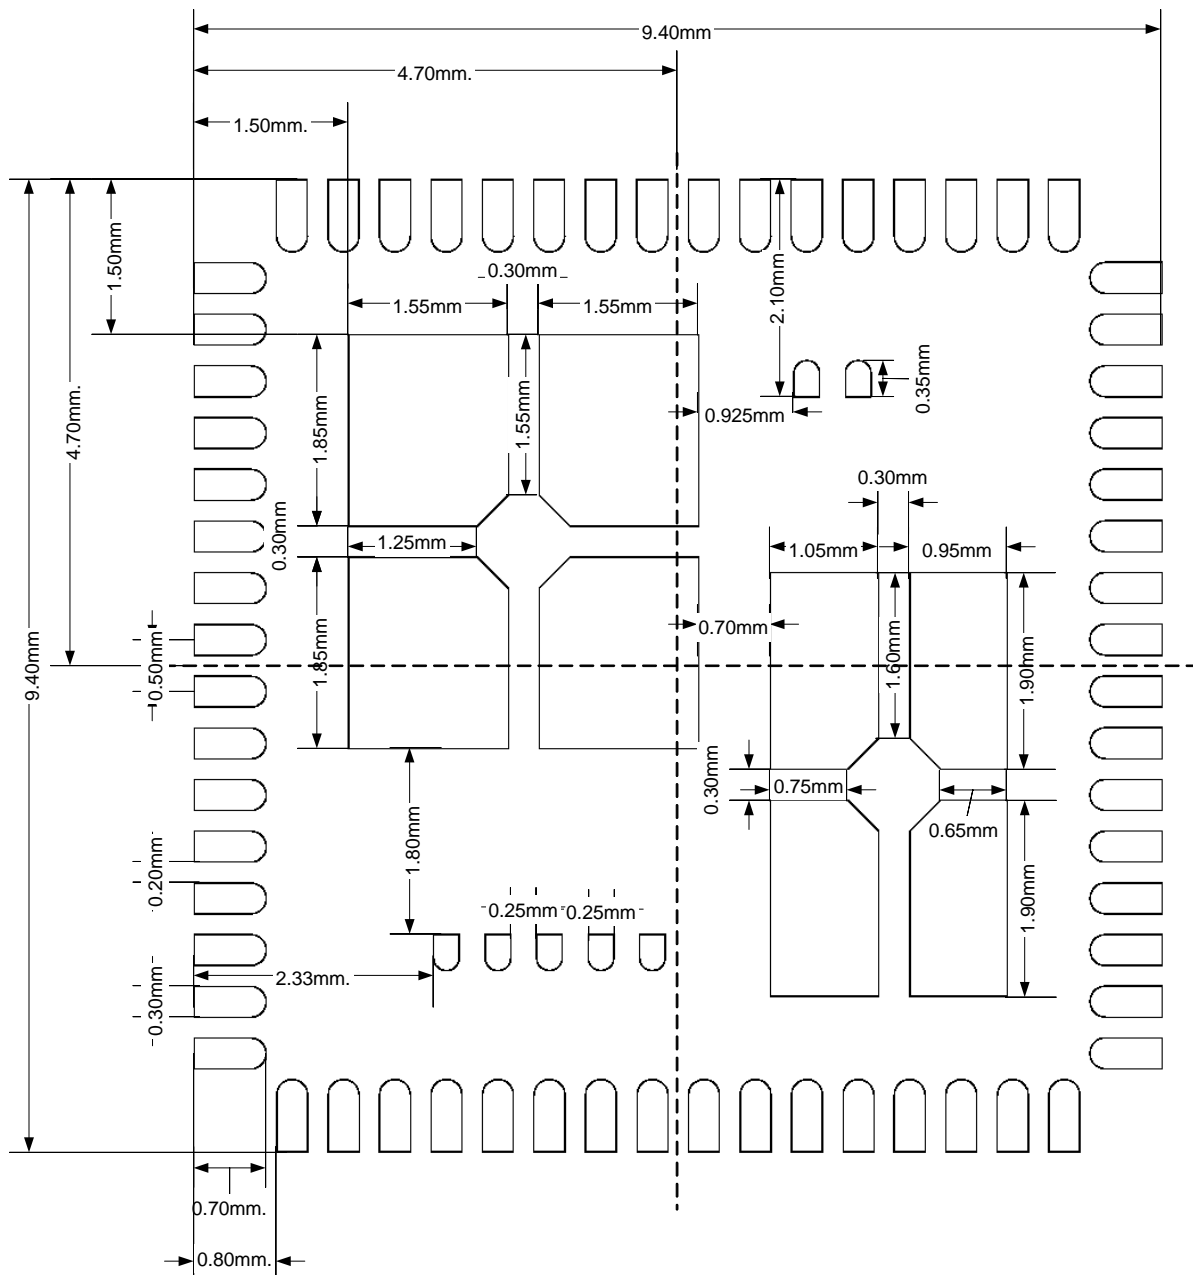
71-Pin LGA Solder Stencil Pattern
